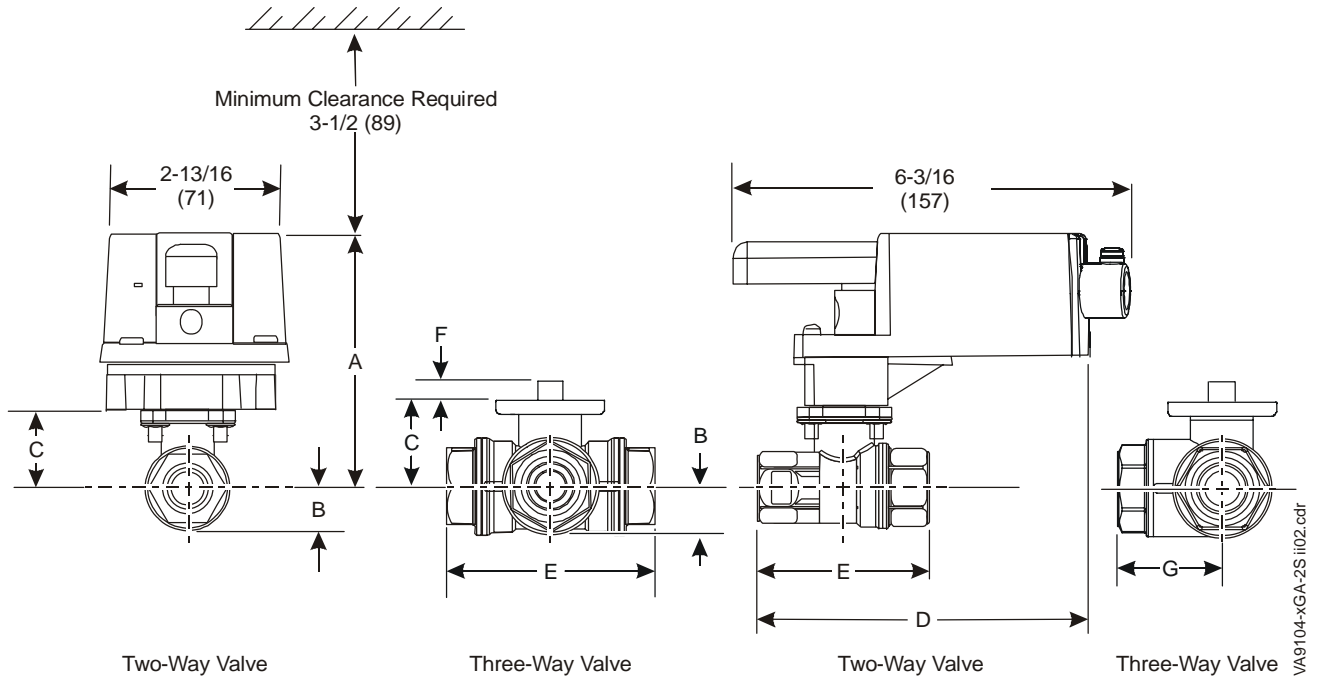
Actuated Ball Valve Dimensions, in. (mm)
